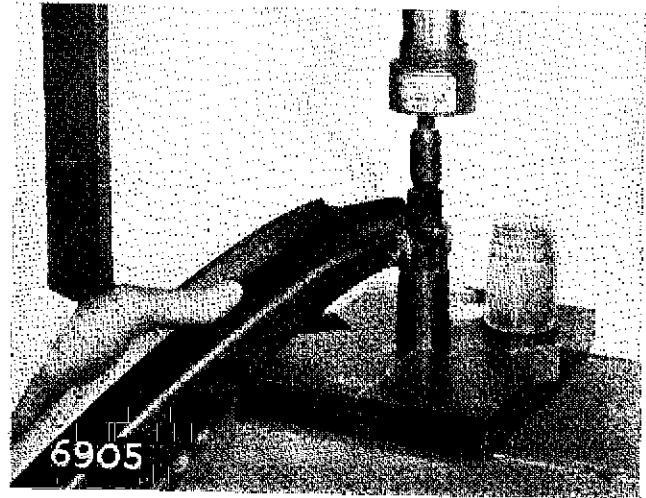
Pressing the metal and rubber bonded bush into the wishbone using the smaller diameter spigot of the RG386 tool
